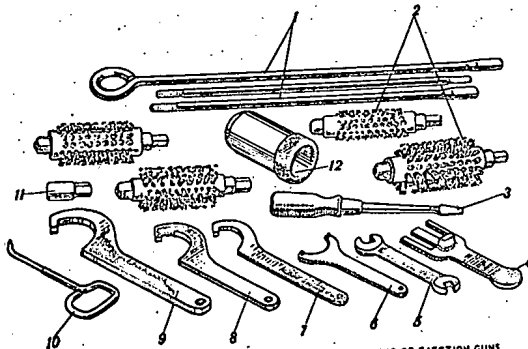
TOOLS FOR DISASSEMBLY, ASSEMBLY, AND CLEANING OF EJECTION GUNS
